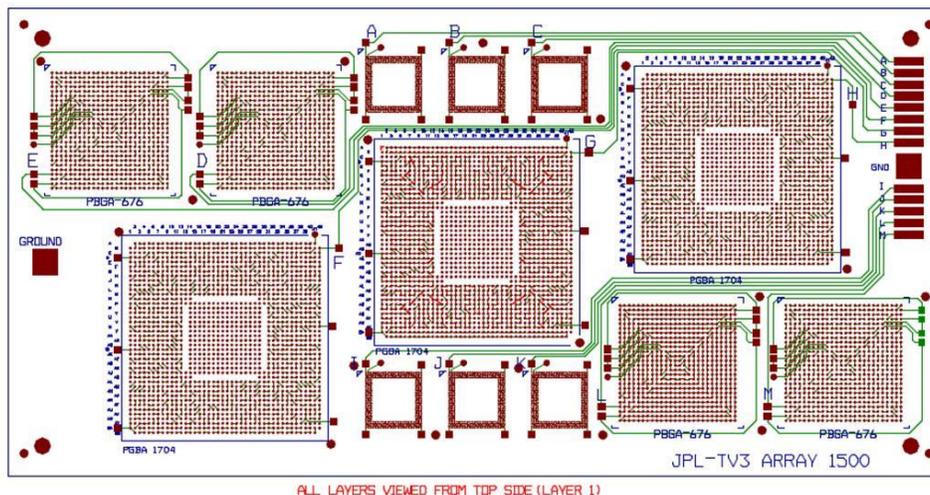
Test vehicle design showing combined package and board daisy-chain patterns at three locations for the 1704 I/O flip-chip BGA (FCPBA) package with 1-mm pitch and 42.5-mm² body size. Location and board daisy-chain patterns for PBGA 676 I/Os and 432 I/Os are also apparent in the design.
